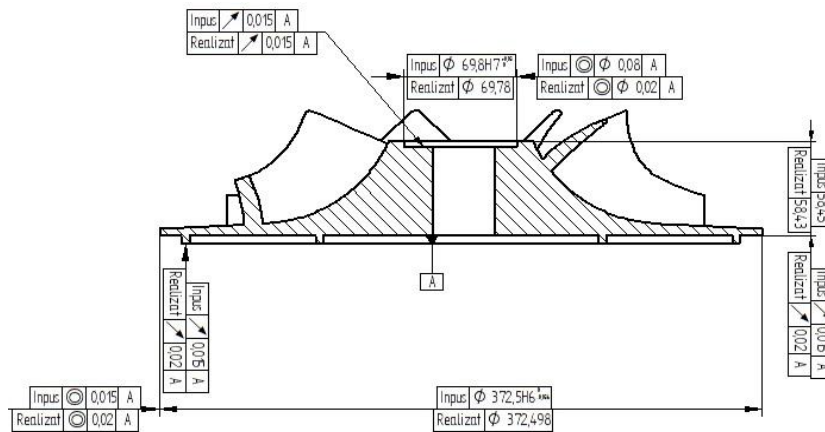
Drawing of the composite centrifugal rotor tolerances and overall dimensions (imposed and achieved)
